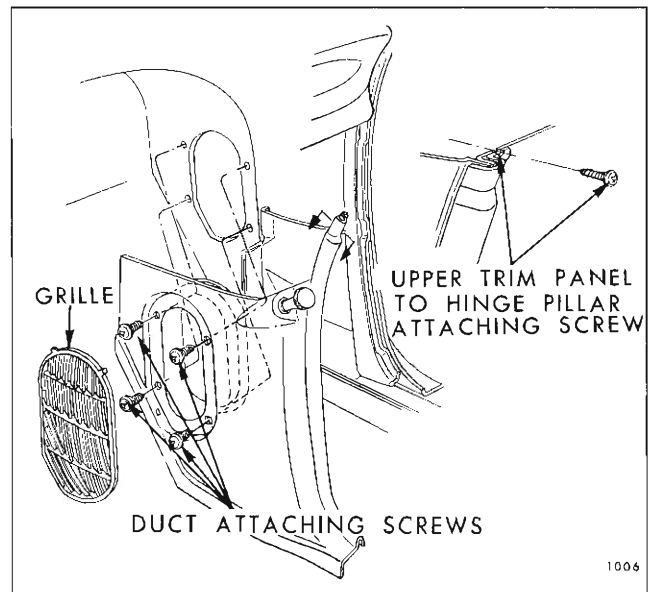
C13—Shroud Side Trim Panel and Duct Assembly
